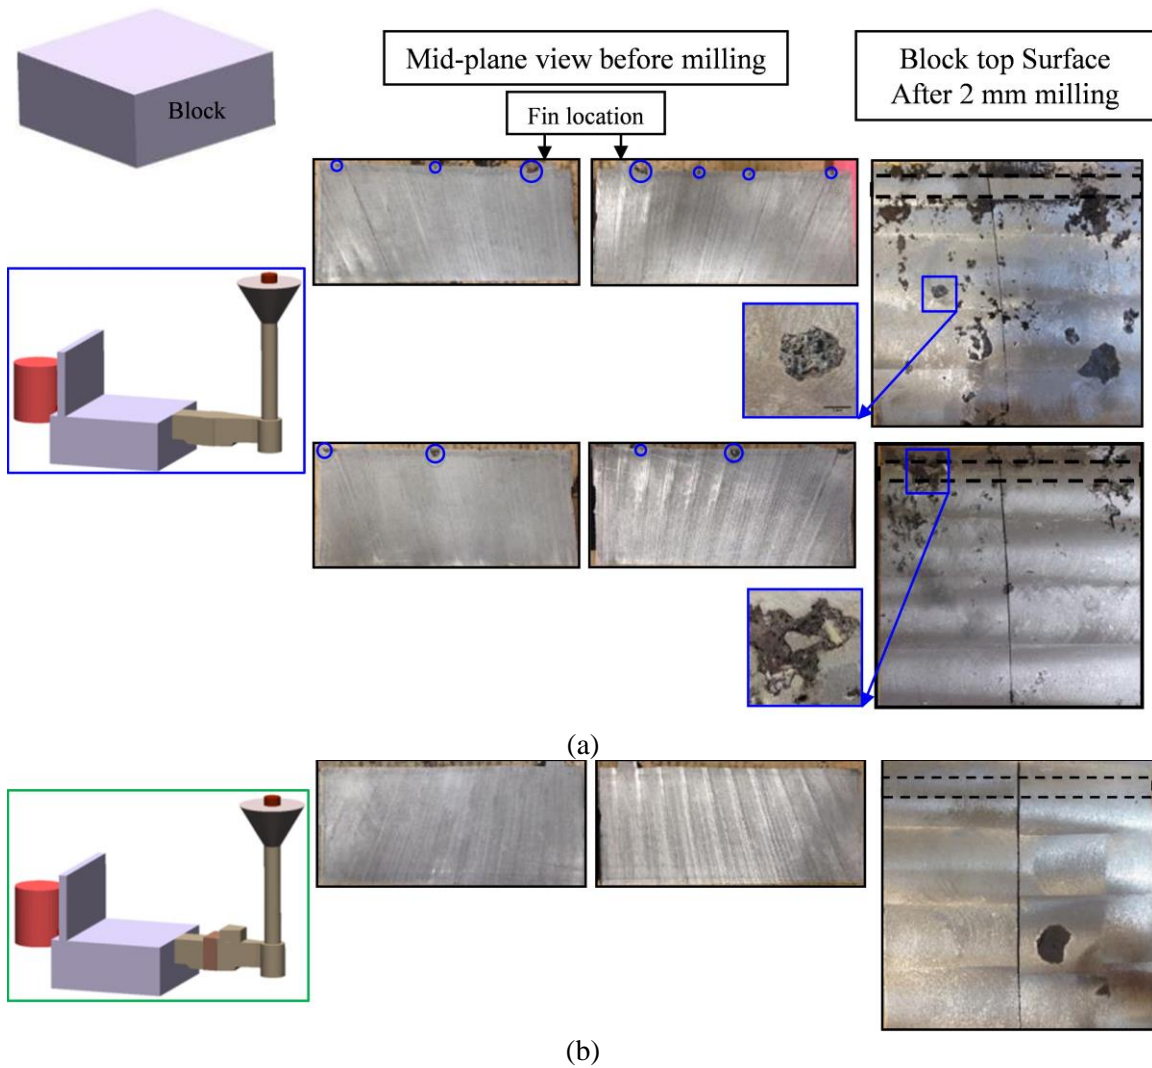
Castings with thin section (a) Casting with filter, and (b) casting without filter.
